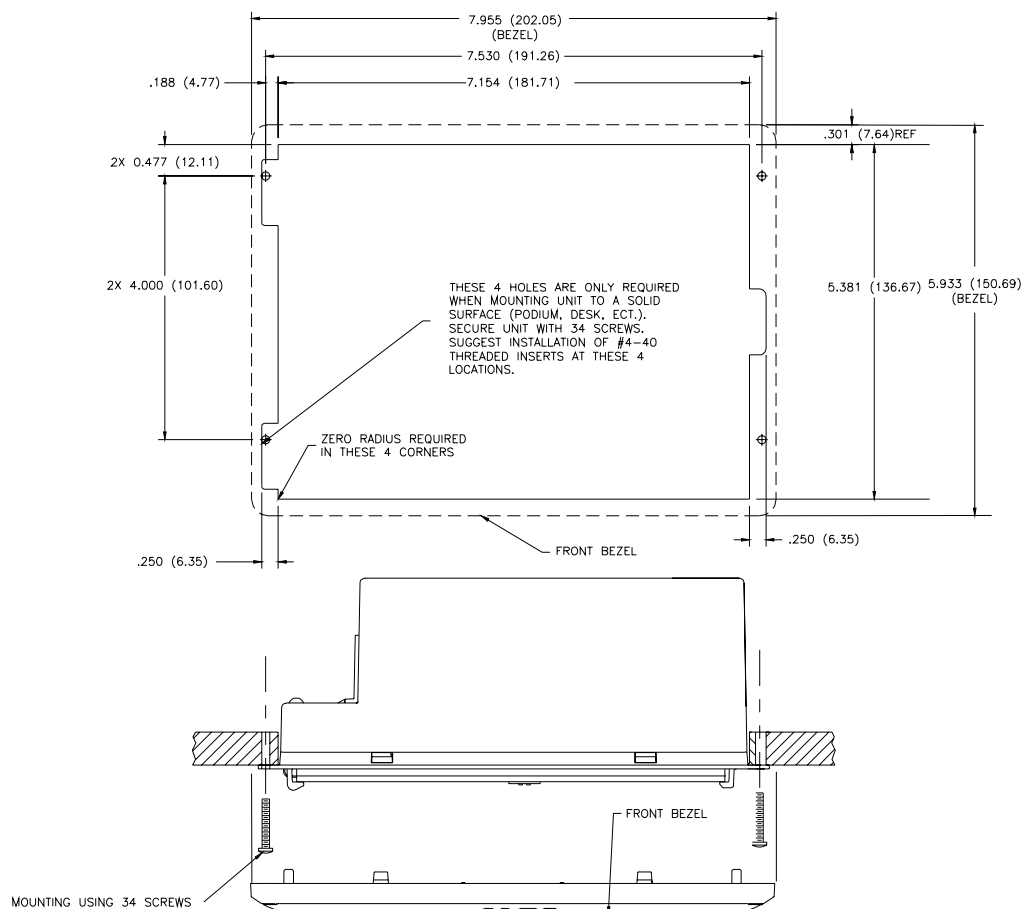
NXD-CV7 Wall Mount panel dimensions using #4-40 mounting screws
